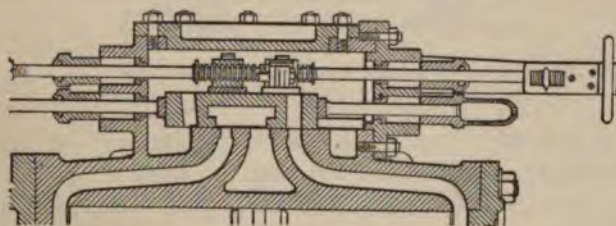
The Meyer Expansion-valve Gear. Scale 1/12th.
